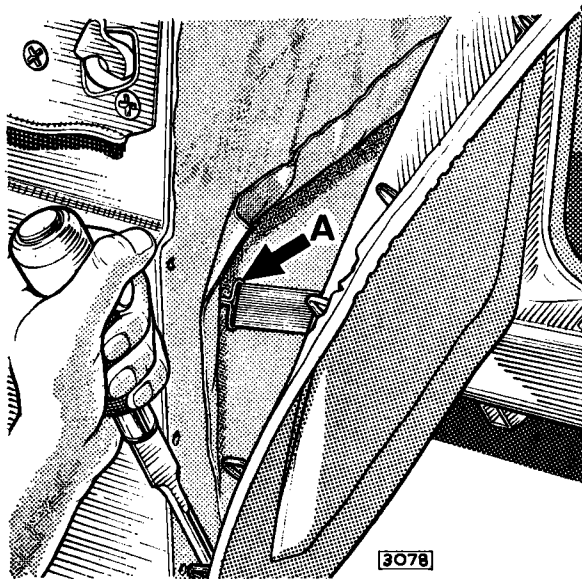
Removal of the door trim casing. Arrow "A" shows the location of the map pocket tensioner anchorage
